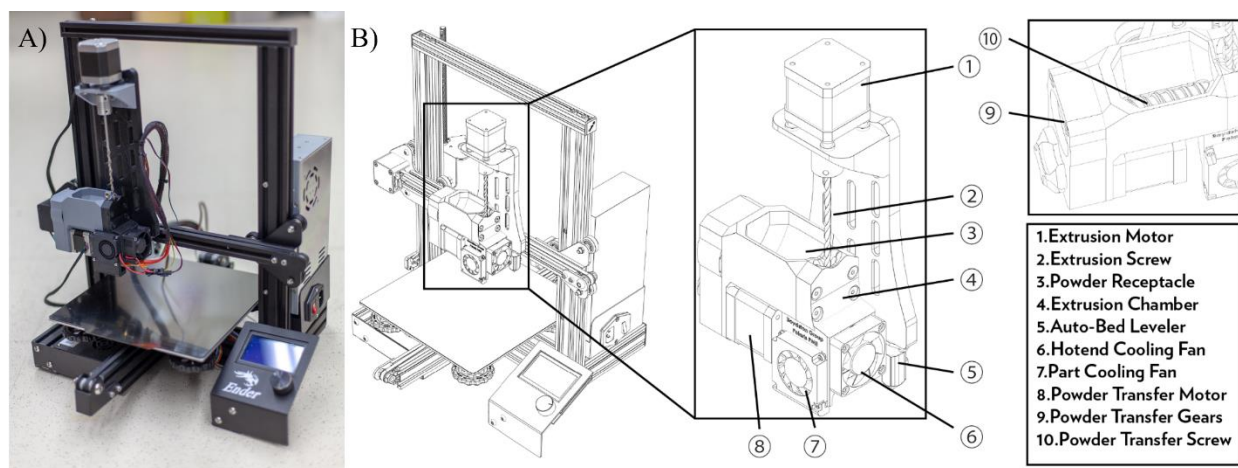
A) PME printer build B) PME printer design with the print head parts identified.
